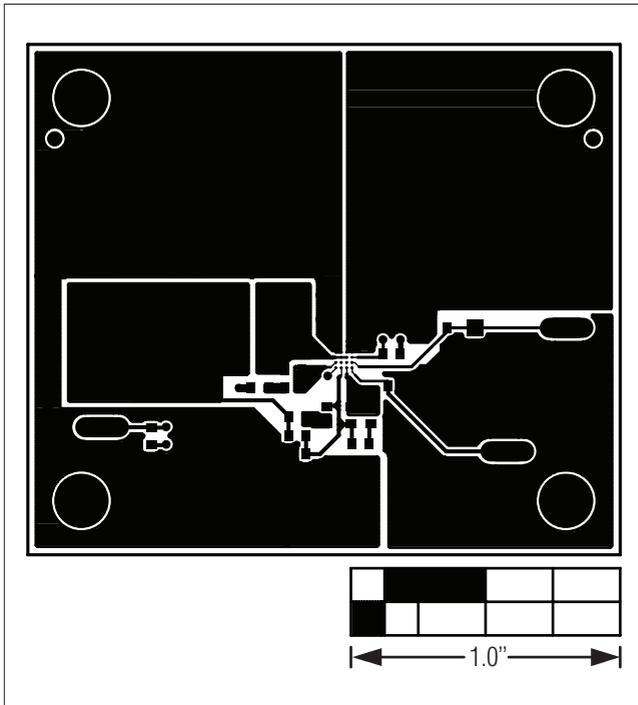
MAX15051 EV Kit Component PCB Layout—Component Side
